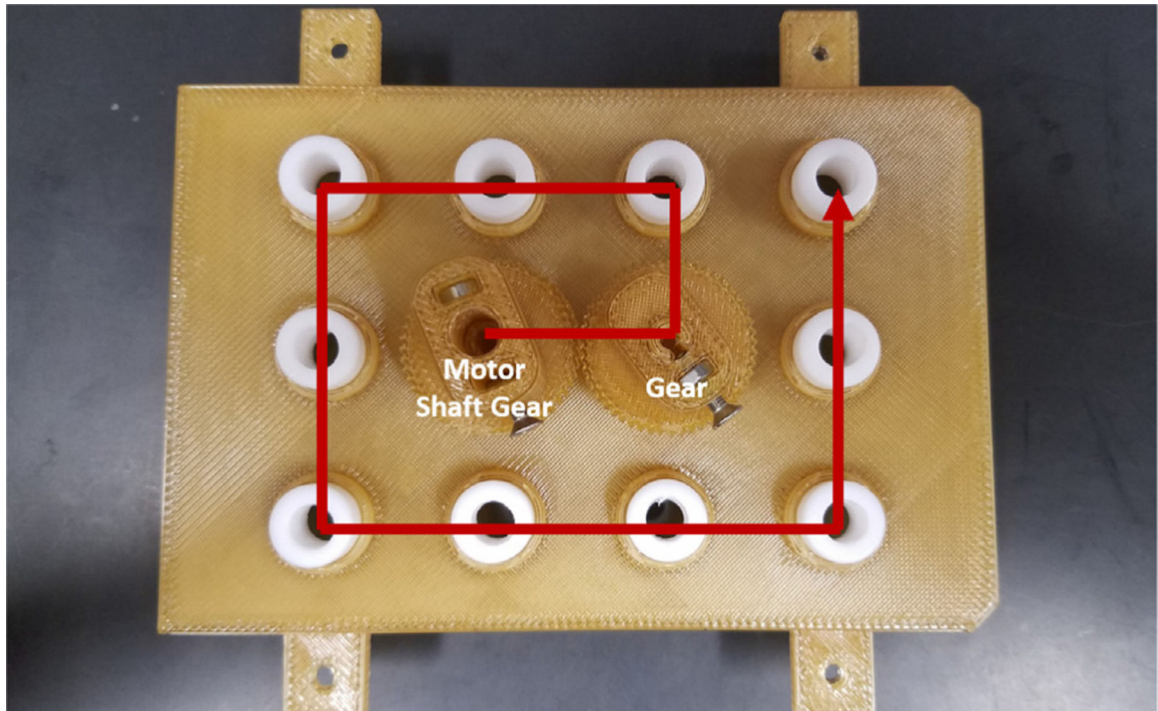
Assembly pattern of the Gears to ensure proper operation. Make sure each gear is properly threaded before moving on to the next one. The position of the Motor Shaft Gear is noted.
